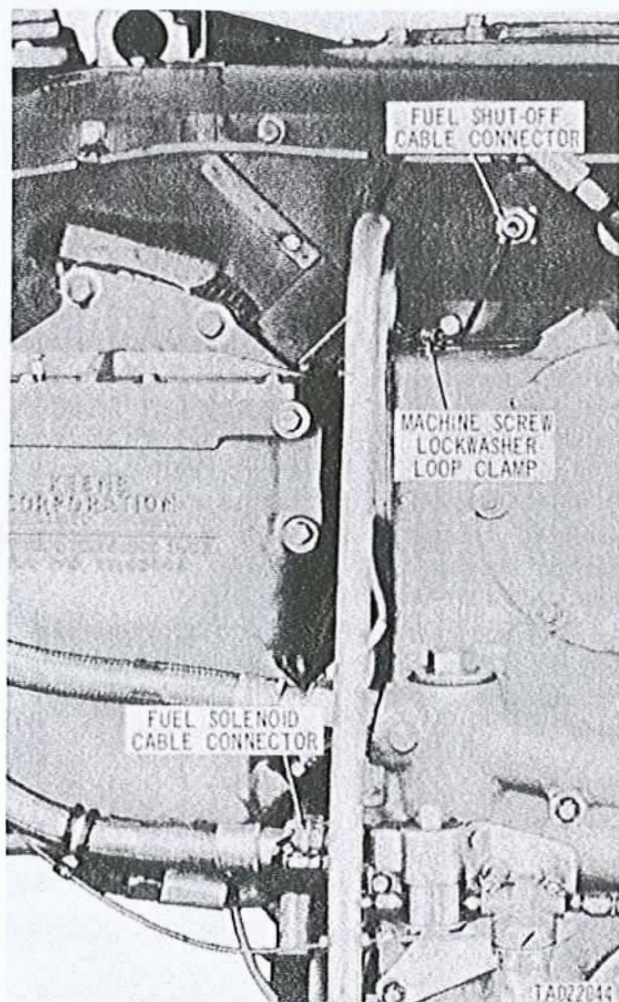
Removing or installing fuel solenoid and fuel shut-off connector.
